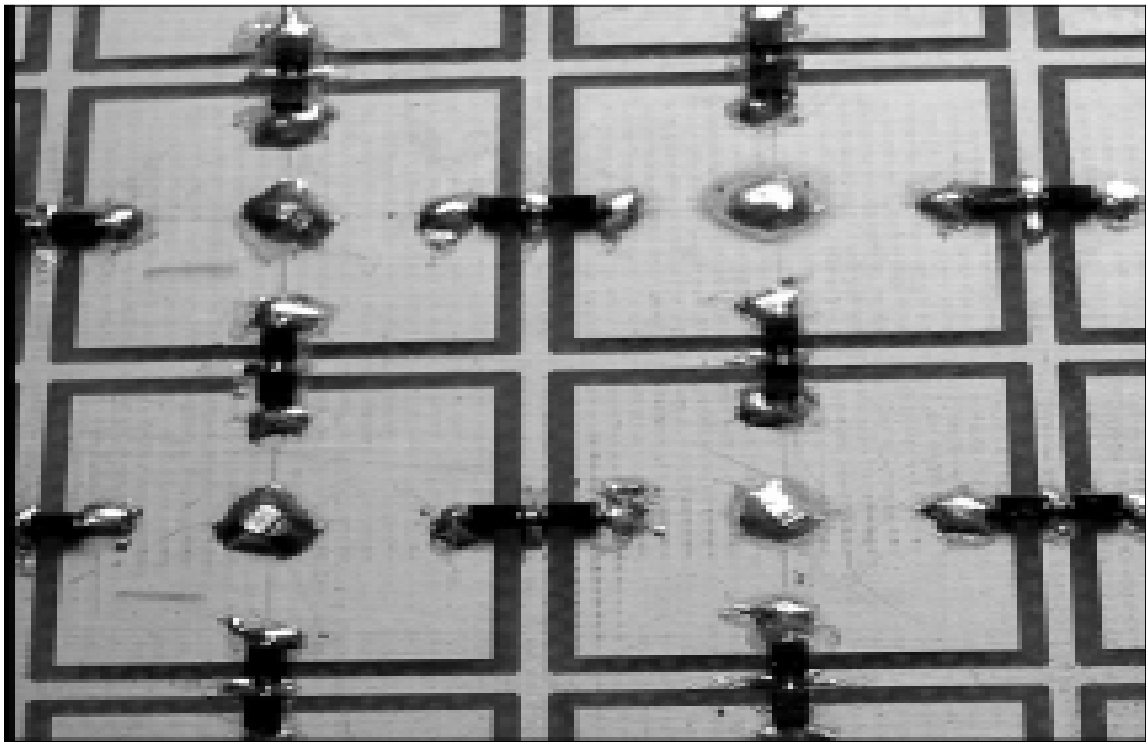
Front Close-up View of the switchable FSS Prototype (directly taken from[49])
